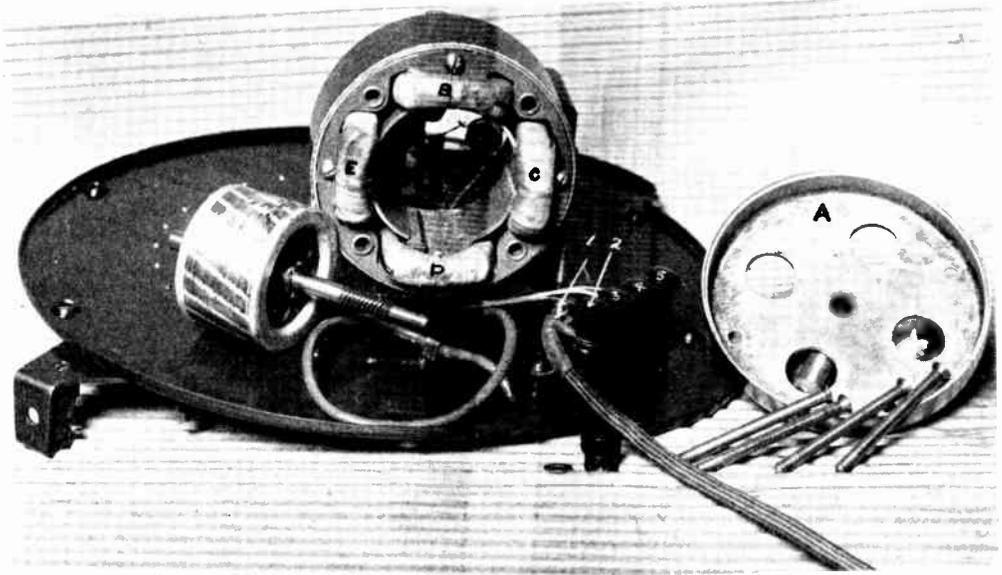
THE ROTOR AND STATOR COILS OF THE COLLARO INDUCTION MOTOR.
